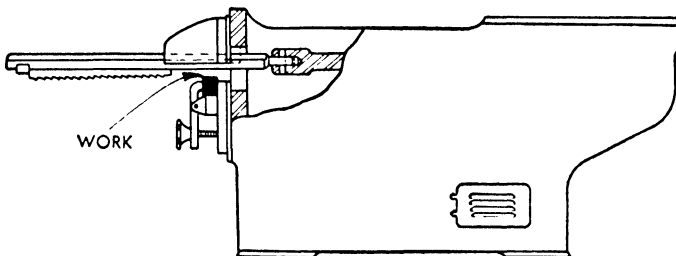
Pull-type horizontal broaching machine adapted for surfacing operations and certain internal broaching cuts. Here the cutting thrust is taken by the bracket attached on the housing just above the work.
